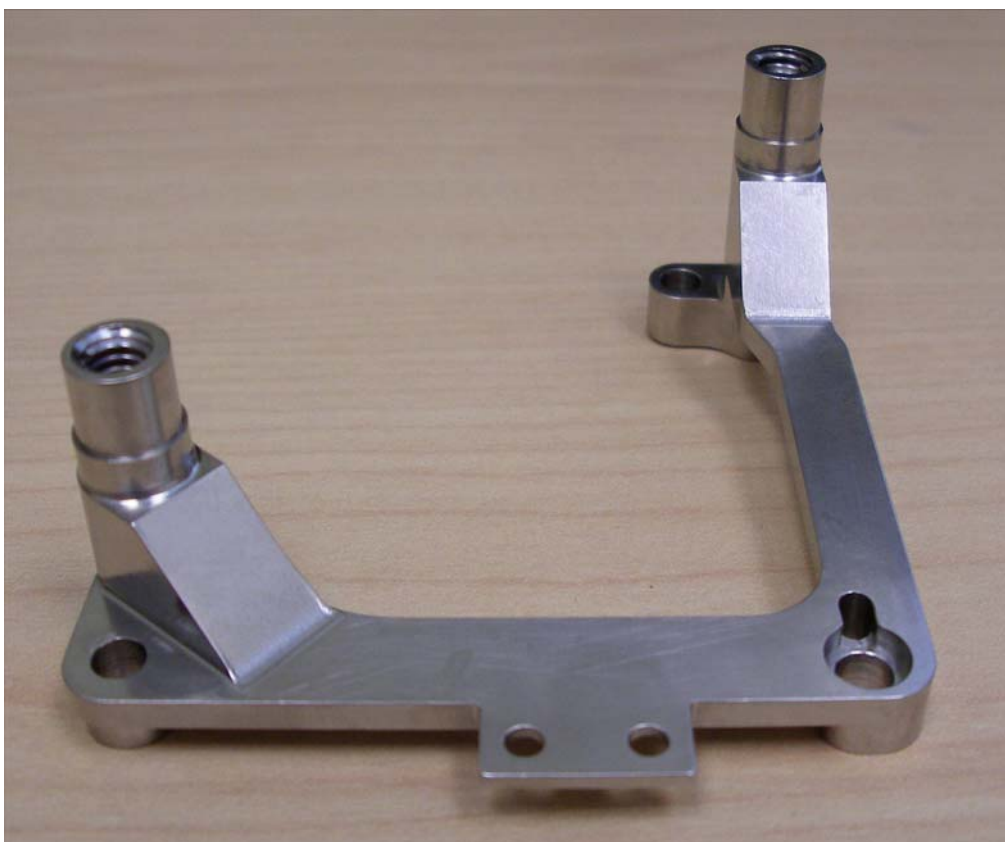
Completed Fully LENS Deposited Bracket After Finish Machining
